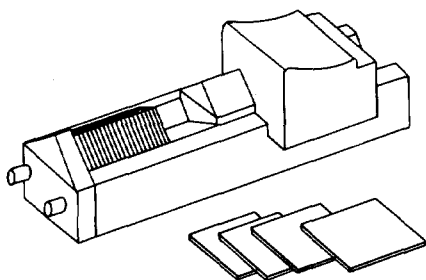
Loaf of crystal dice, all blanks oriented in the same direction in preparation for edge grinding by edging machine
